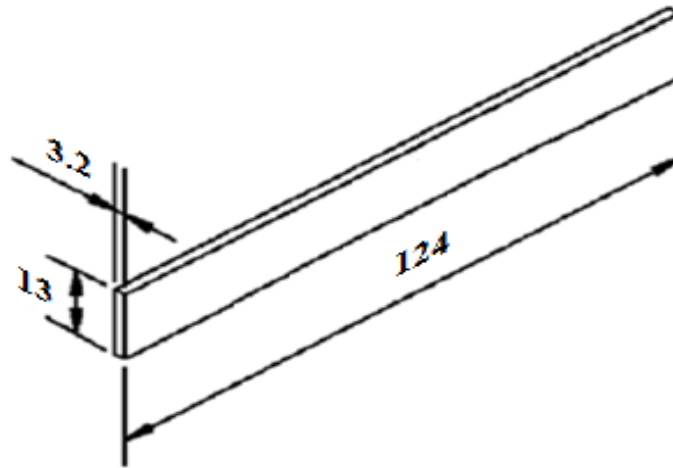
3 point bending sample dimensions as per ASTM D790:2010
